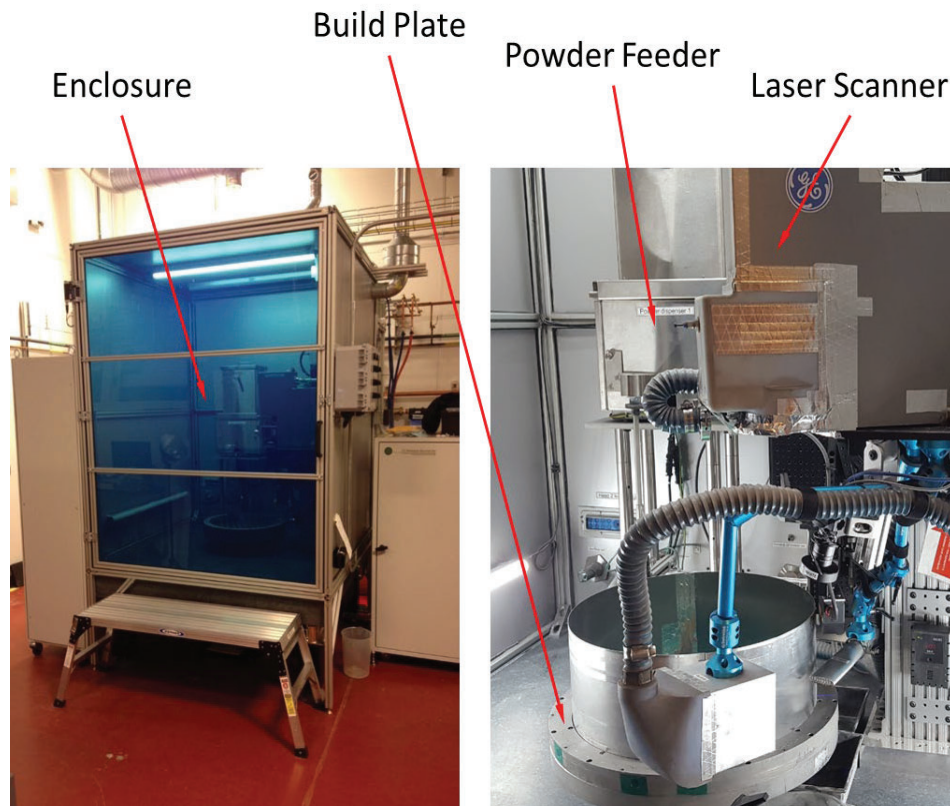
System Prototype. The demonstrator system can build parts to 24" diameter and 10" height.
